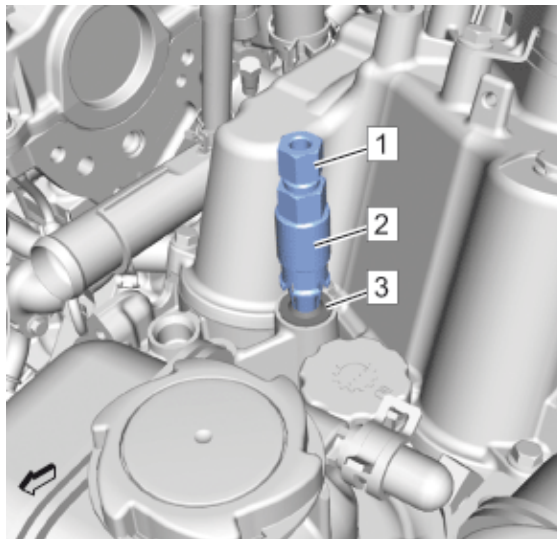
Manual Shift Shaft Seal And Removal Tools
